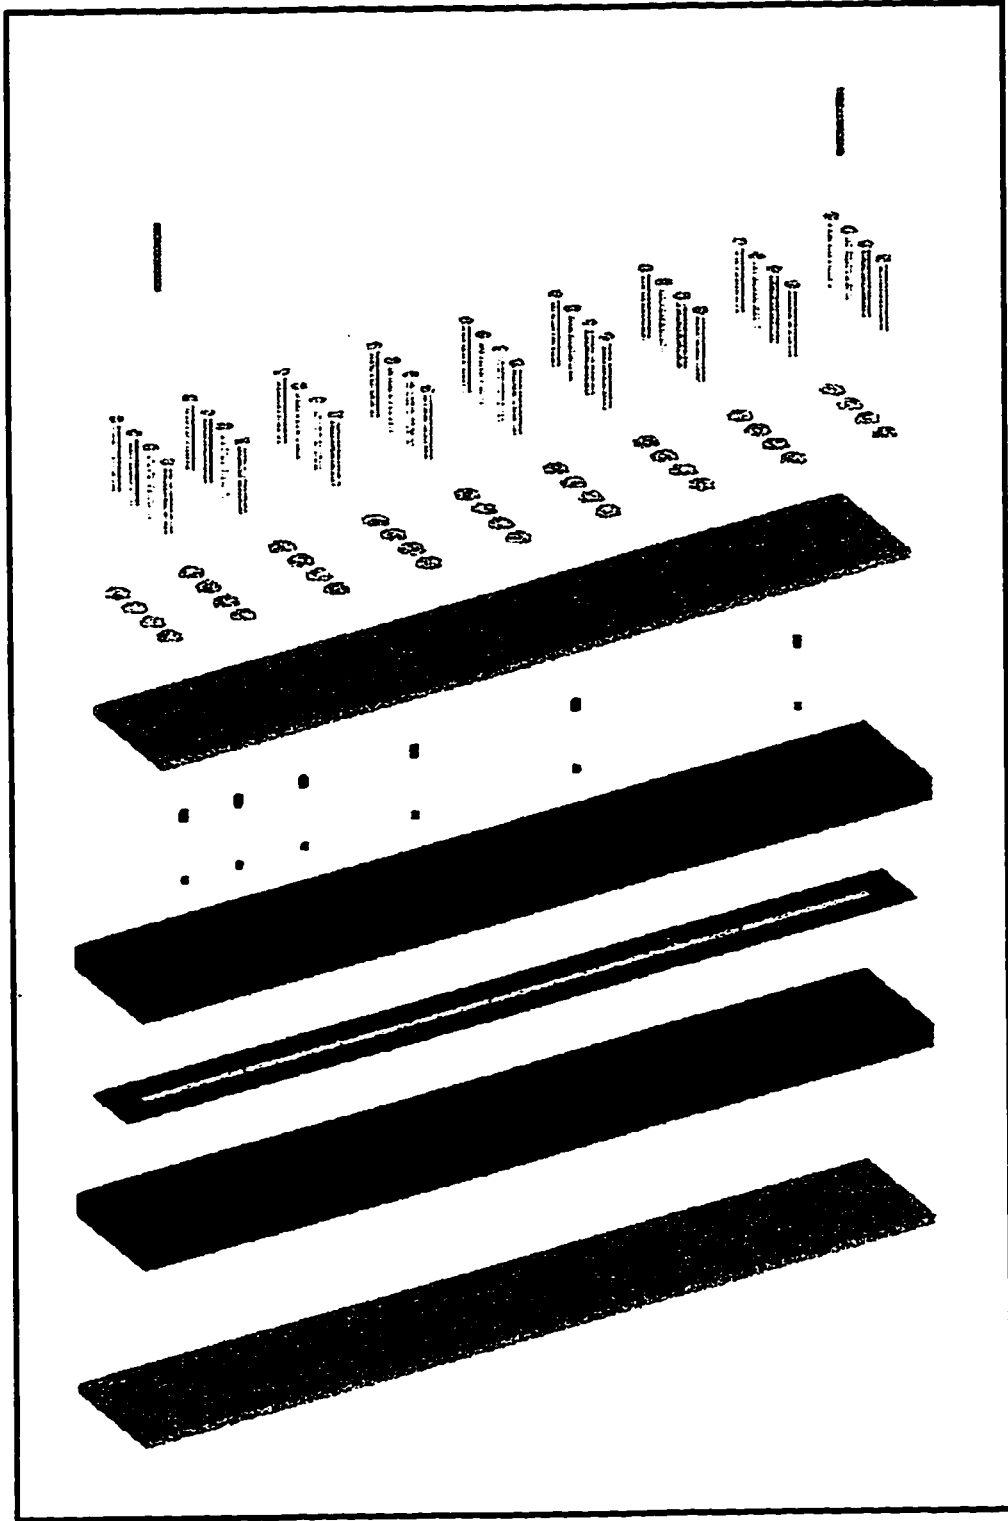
Exploded view of the rectilinear flow cell.
